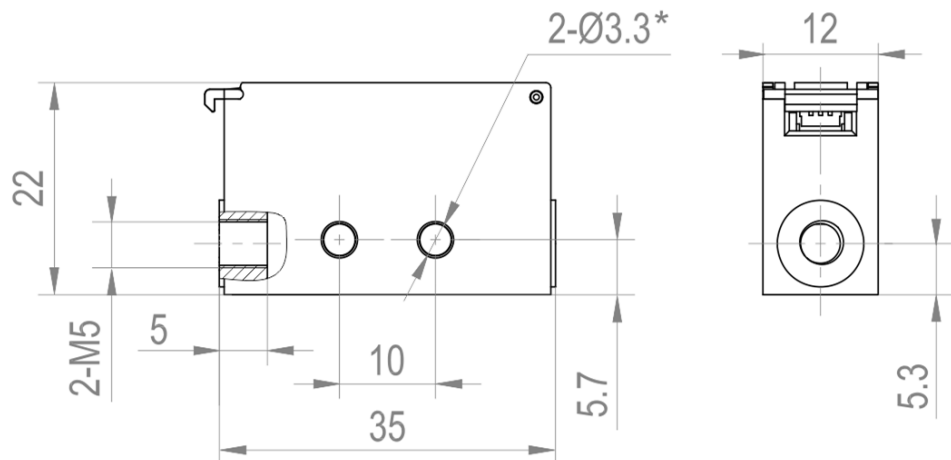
FS8001 / FS8001N mechanical dimensions.
